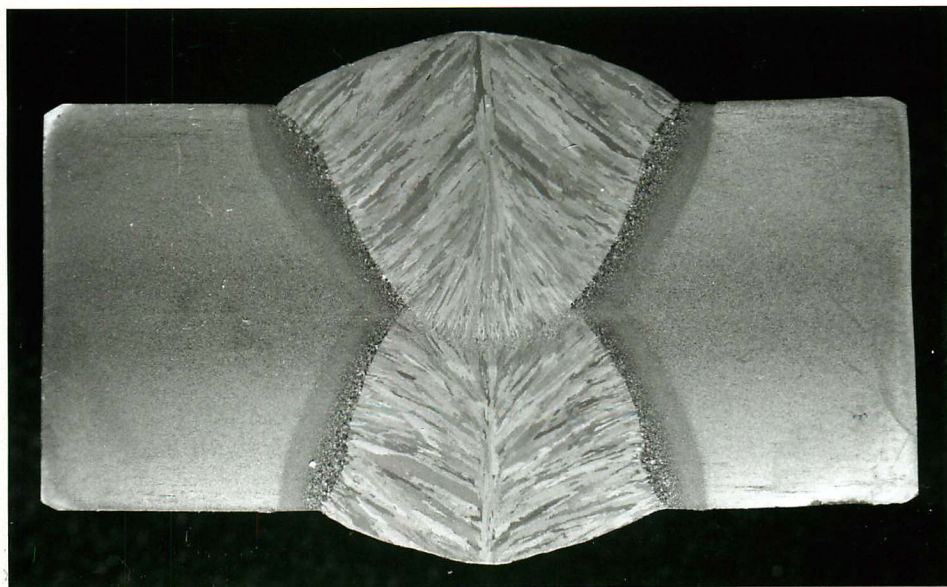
Photomicrograph of a submerged-arc weld deposit. One pass was made on each side of the weld. The plate is 19 mm thick.
